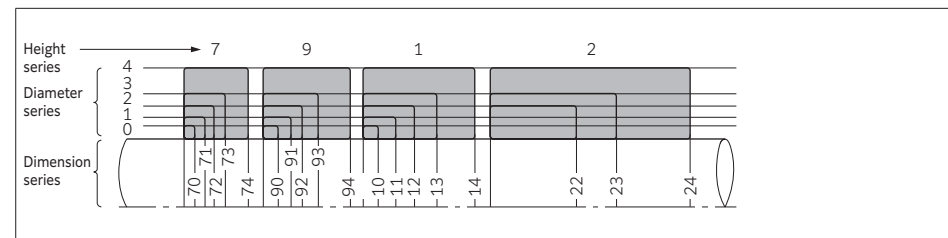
Dimension series for thrust bearings (excluding diameter series 5)
